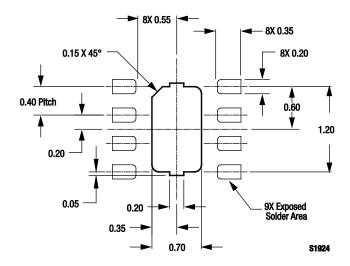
SKY13317-373LF PCB Layout Footprint (Top View)
